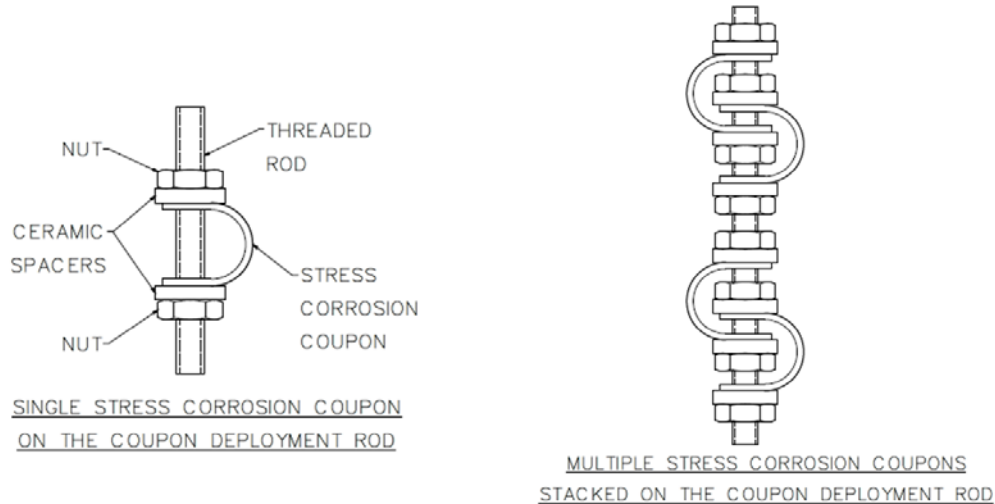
Stressed Corrosion Coupons on the CMMS Deployment Rod
